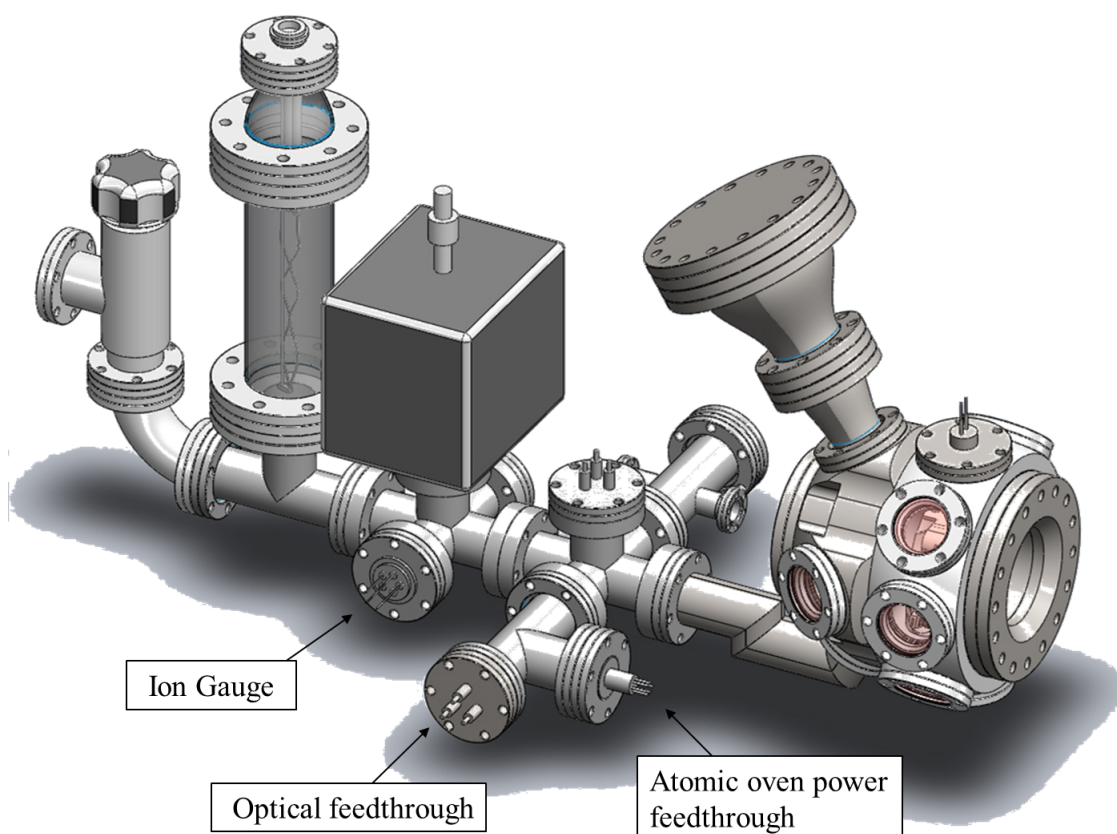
SolidWorks drawing of the whole vacuum system assembly.
